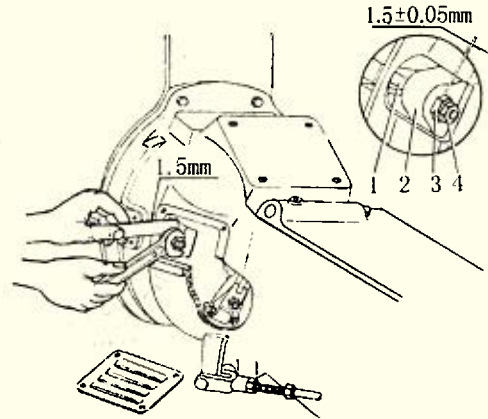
Adjusting the disengagement travel of the main clutch
